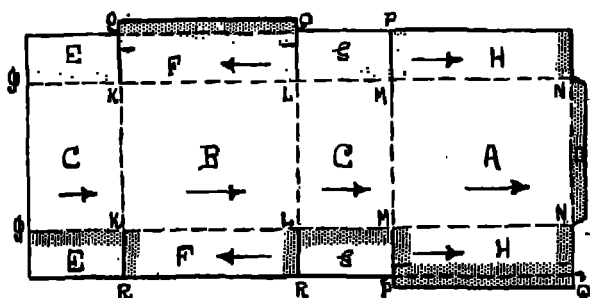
SINGLE-PIECE PACKET IN WHICH A WHEATEN BISCUIT FOOD IS SOLD.
